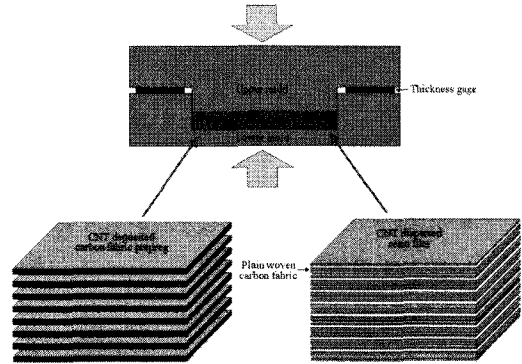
Schematic diagram of fabricating specimens using hot press molding.
